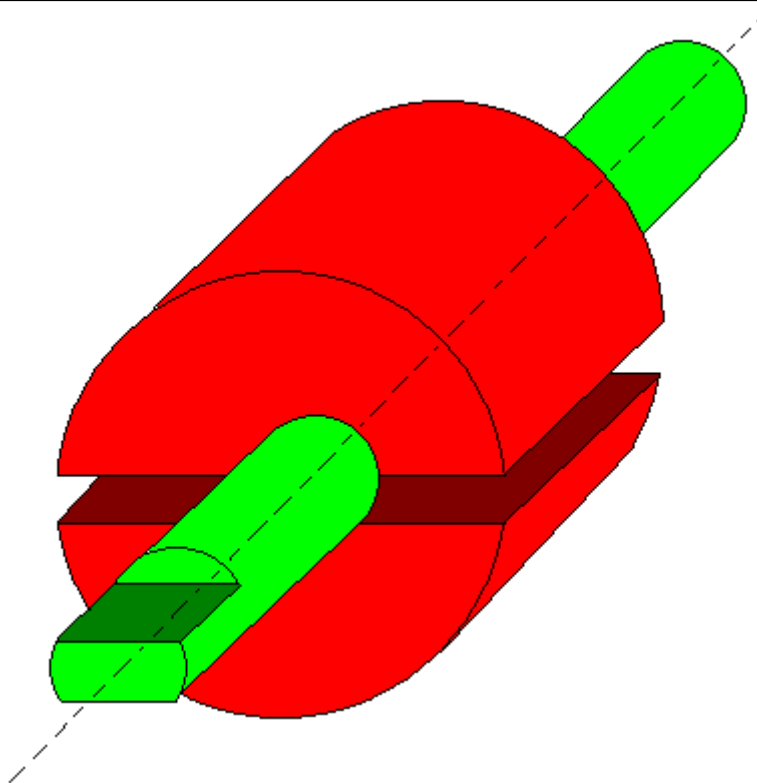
A sample for the Almen-Wieland test rig
